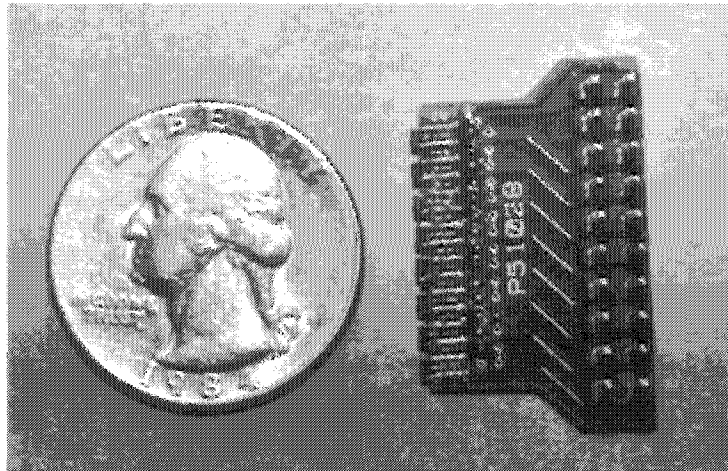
Picture showing the PCB with 8 HW105A Hall sensors mounted on its edge.
